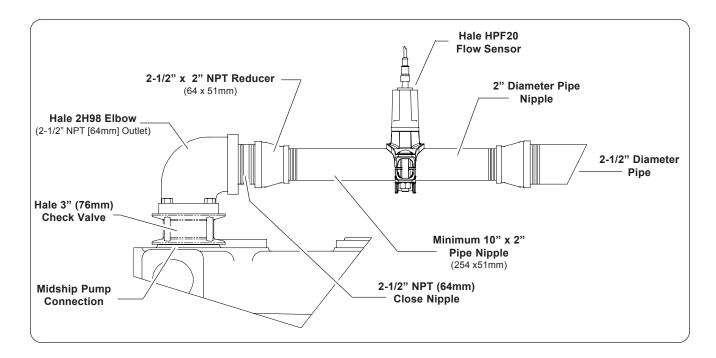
Typical Reduced Size Sensor Piping Arrangement
